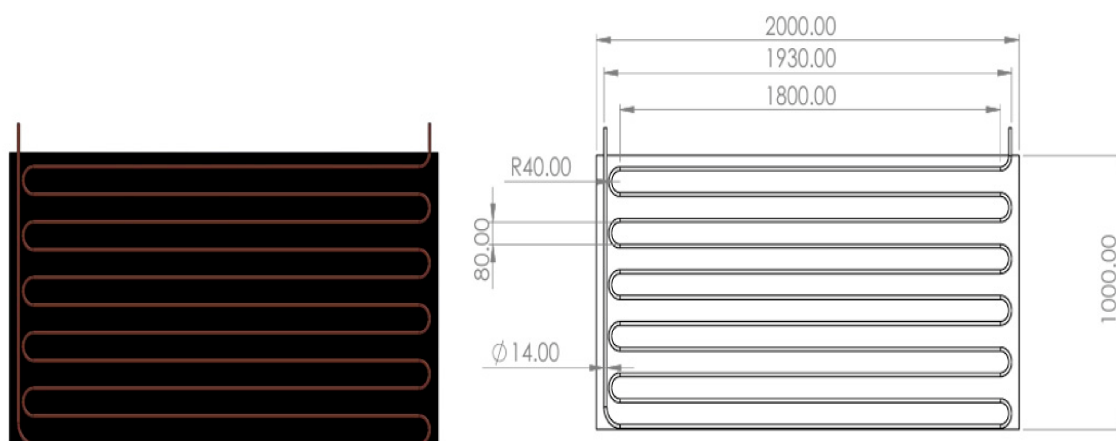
Dimensional details of the galvanized steel absorber plate used in the TSWH prototype.
